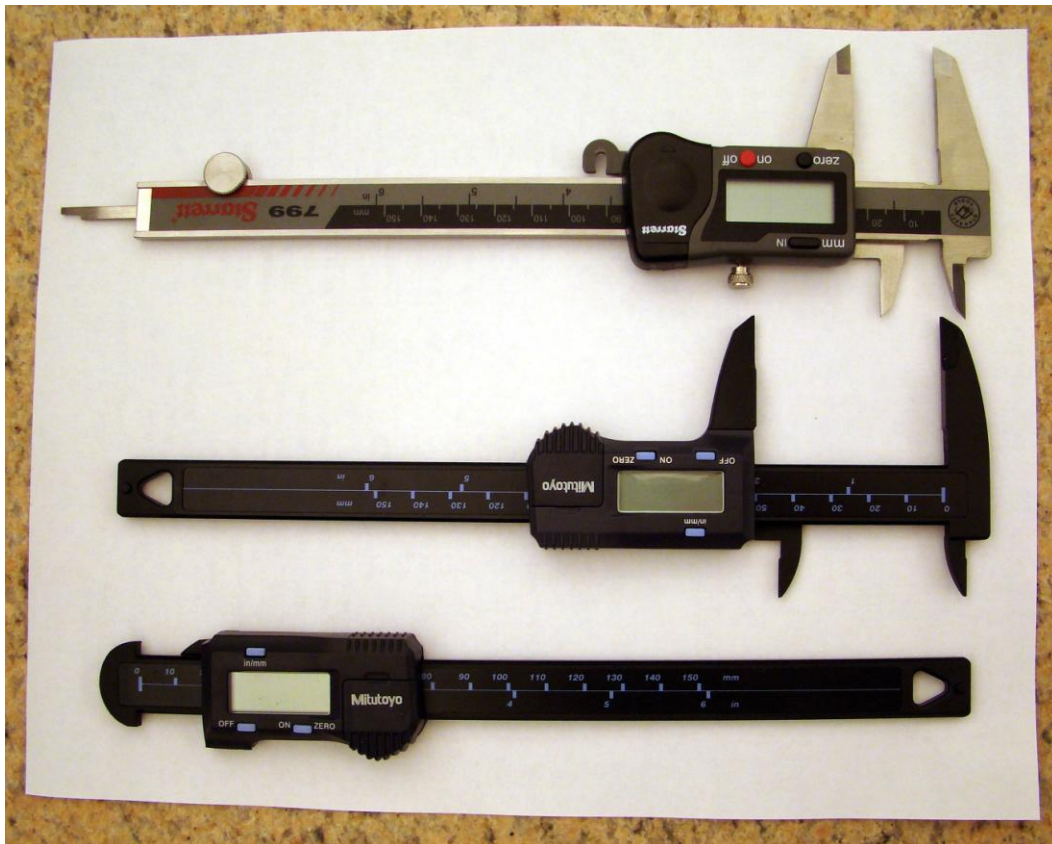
Digital calipers used in armor testing. The ATC standard caliper with the small end (3 mm) is shown at top. Caliper used by commercial testers (H.P. White Laboratory and Chesapeake Testing) with the large 19 mm tip is shown at bottom. The dimension of the wide tip was measured by Chesapeake Testing at the request of the committee. (The center caliper is not used.) SOURCE: H.P. White Laboratory.
